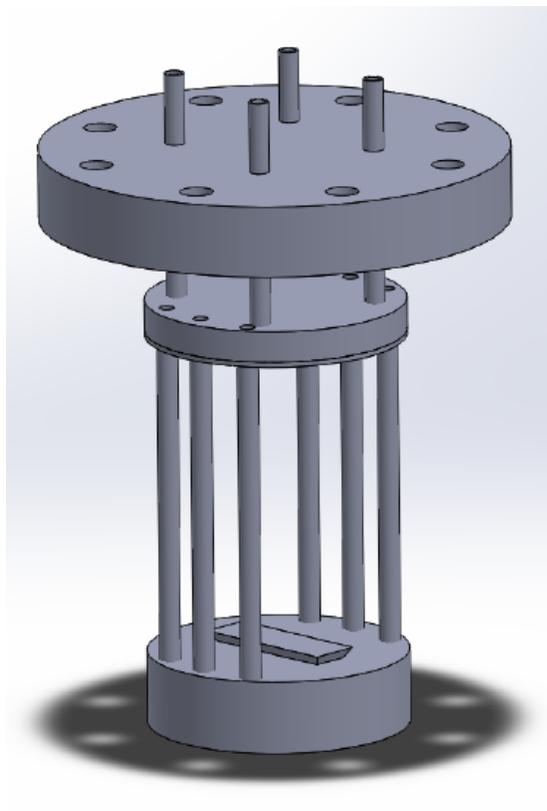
Solidworks modeling for the combination of showerhead and stage holder
